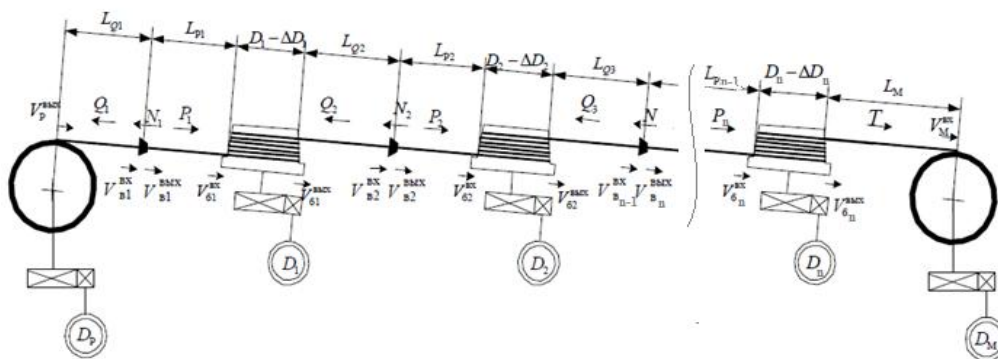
Design scheme of n- multiple straight-through drawing machine [2]
